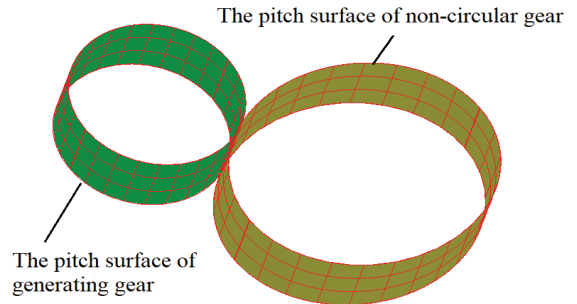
Basic principle of using cylindrical gear shaper to produce NCGs
